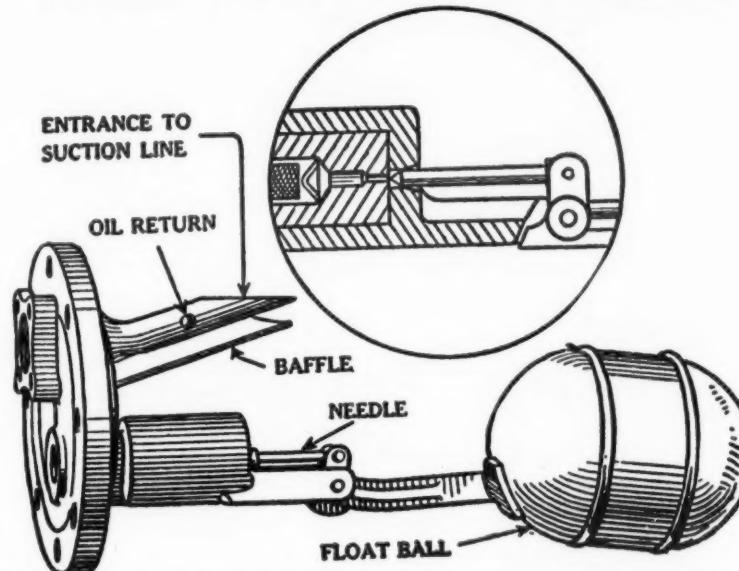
A typical float valve assembly. If suction tube has been bent upwards, the oil overflow hole will be moved too high.
